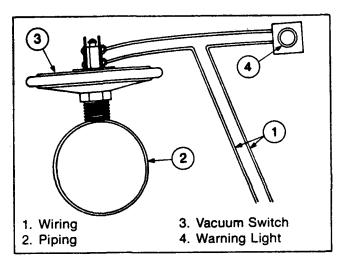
, (N21905). Vacuum switch to check air inlet
